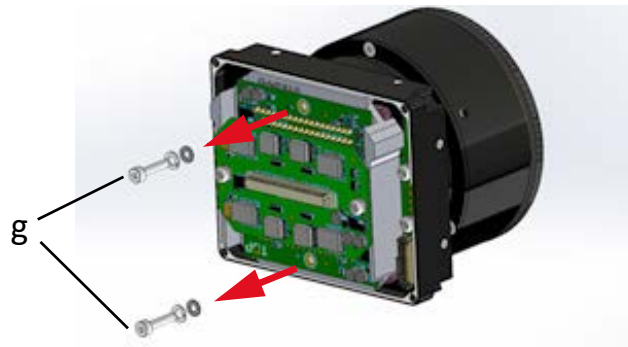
Loosening the two M2 x 10 socket head cap screws and spacers
